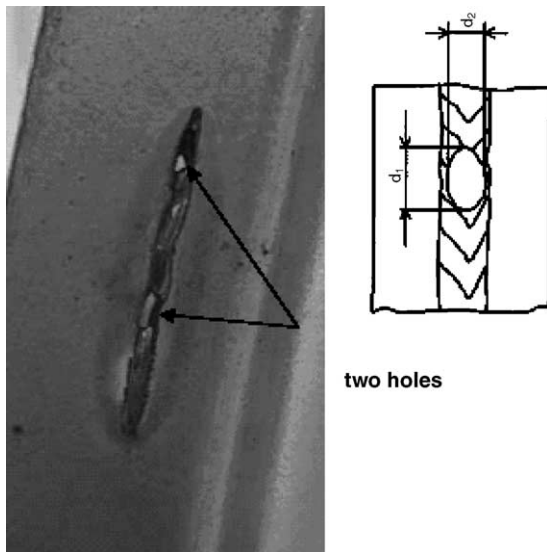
Porosity formation or holes in the laser weld bead.
